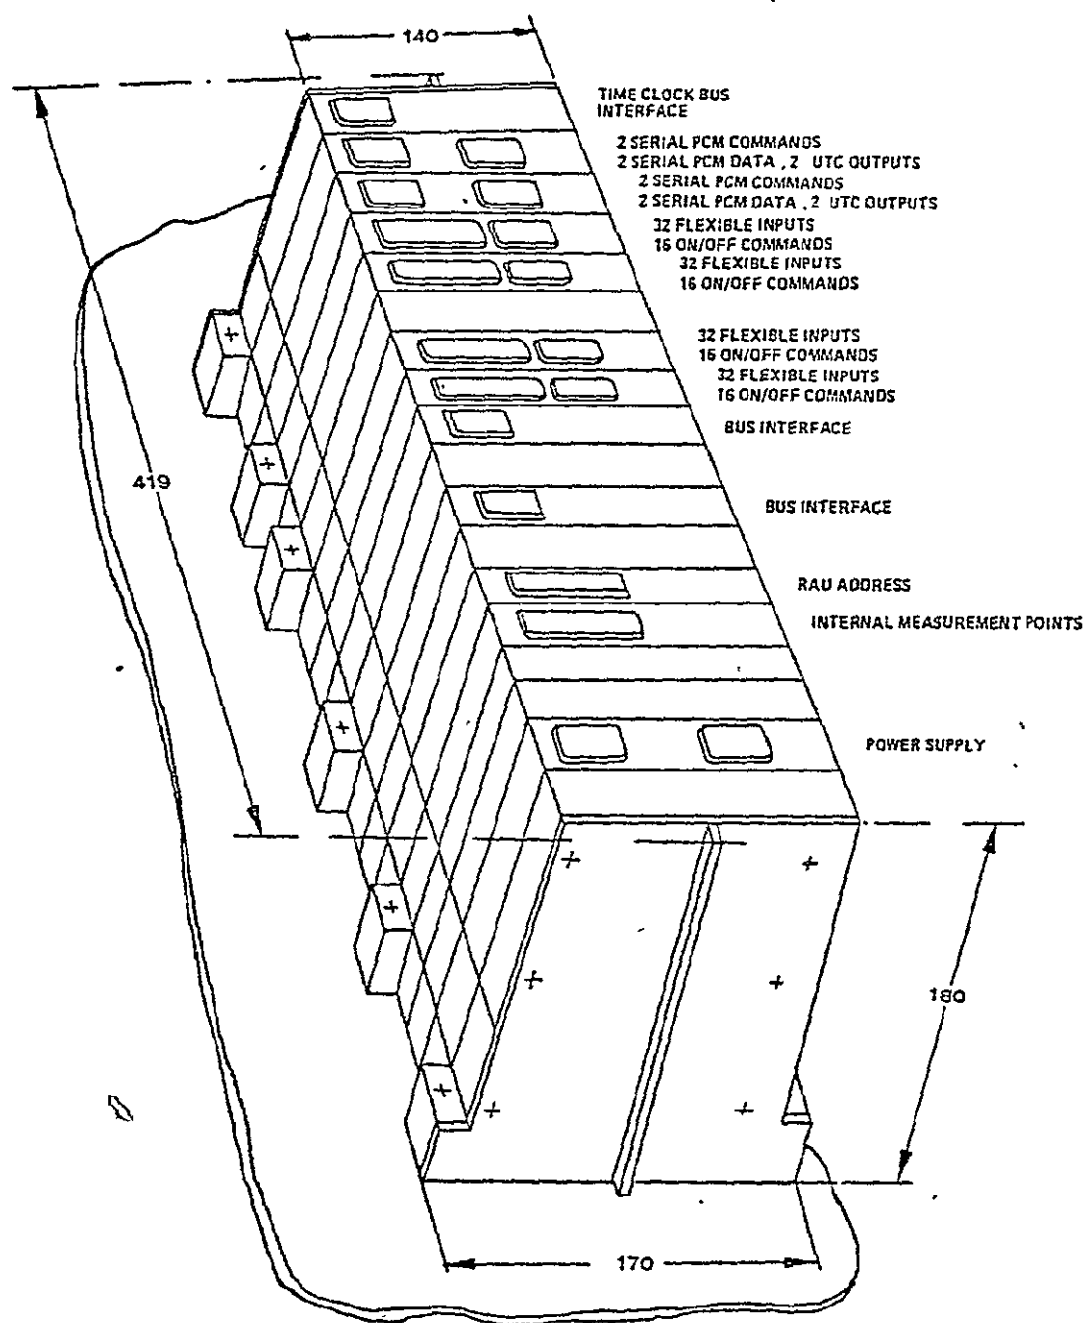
PHYSICAL RAU DIMENSIONS
